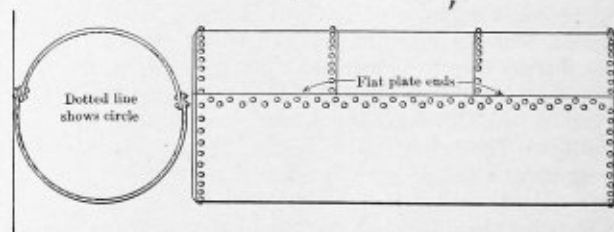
BOTTOM HALF OF ONE SHEET.
